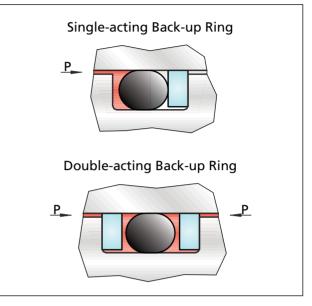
Single-acting and double-acting sealing configurations with Back-up Rings
